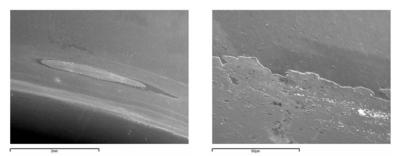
Scratches and PyC coating detachment correlated to defects in the surface finishing process
